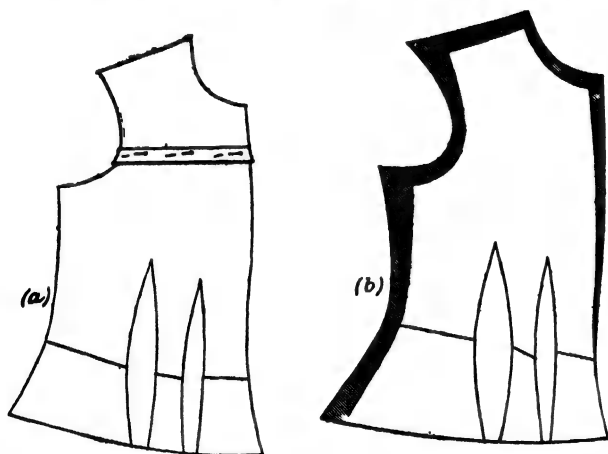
Altering Front (a) Shortening, (b) Lengthening or Widening.
